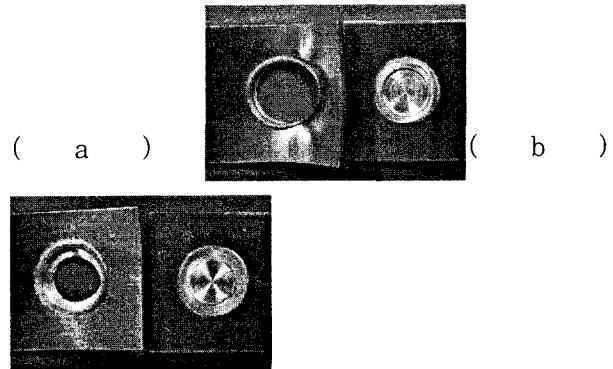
Broken tensile shear test specimens that are welded on (a) 700rpm (b) 1600rpm
